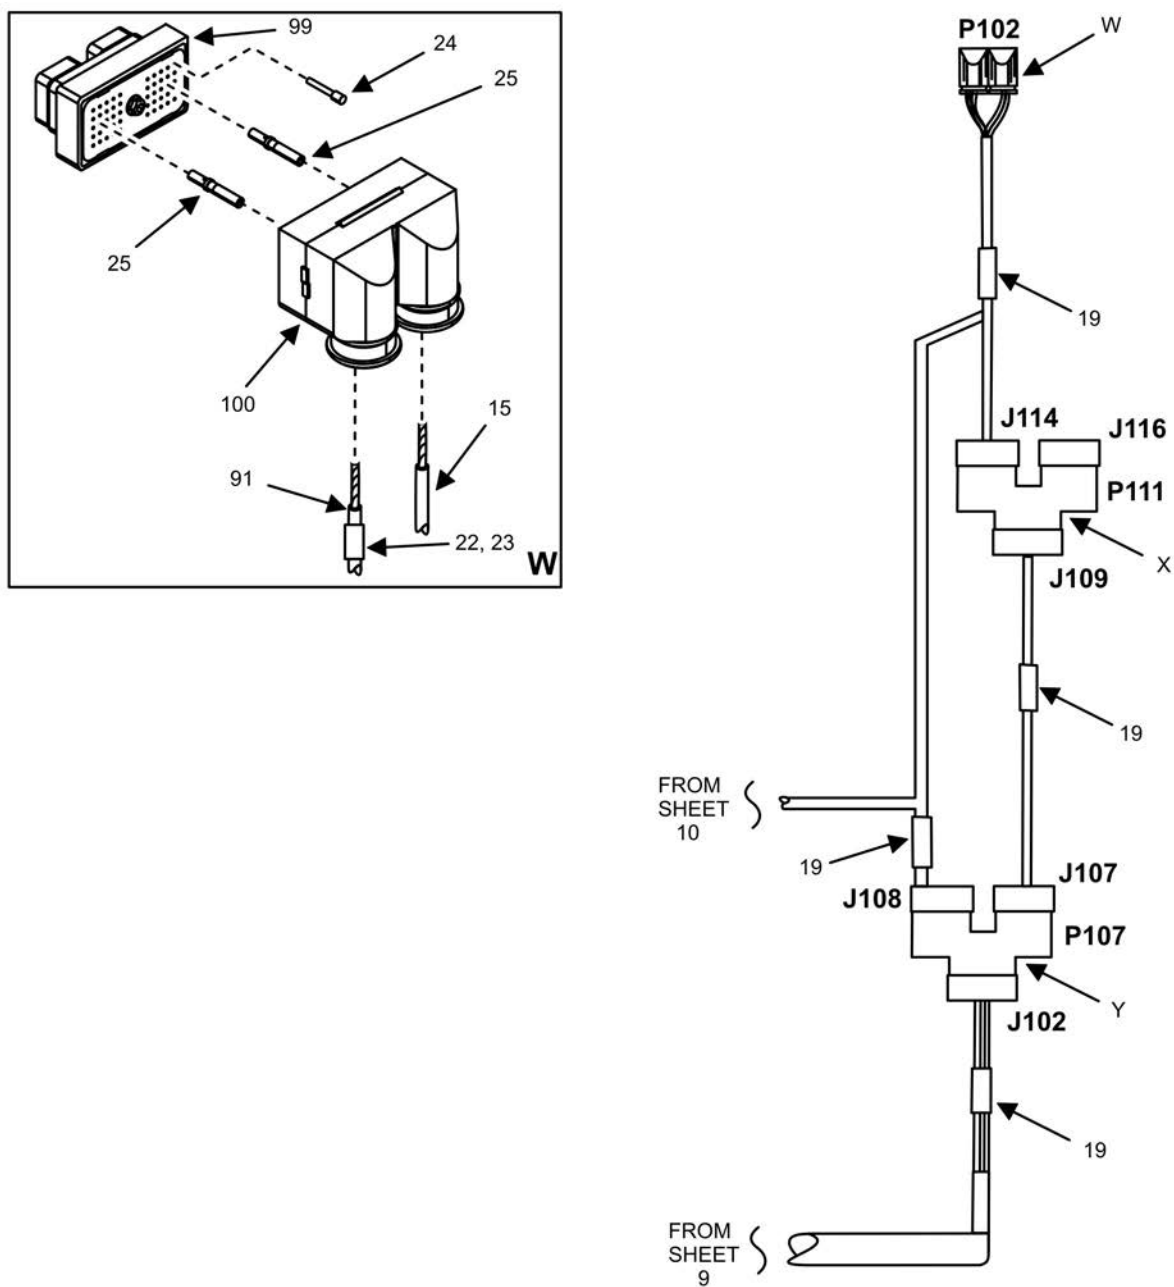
Engine Wiring Harness (Sheet 11 of 19).
